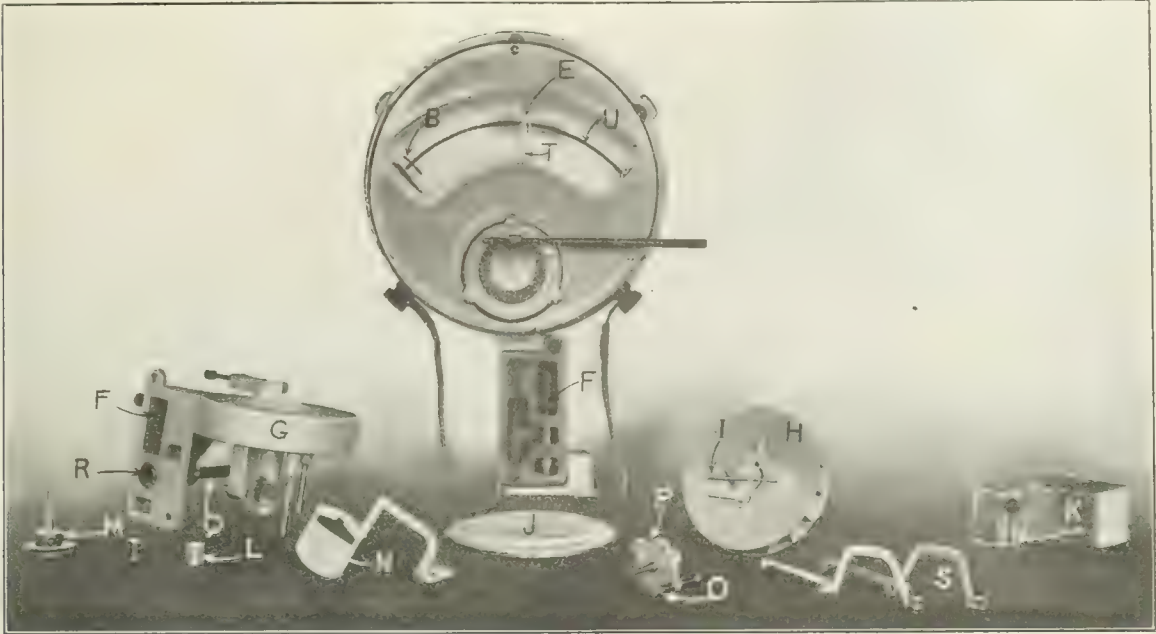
View of the Various Parts of the Operating Mechanism.
